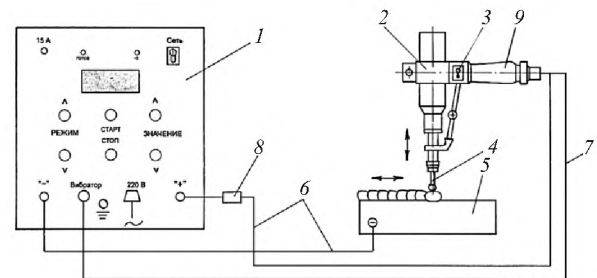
Equipment for ESA: 1, source control panel; 2, vibrator; 3, switch; 4, electrode; 5, component; 6, welded cable; 7, electric motor supply lead; 8, series resistor; 9, handle.
